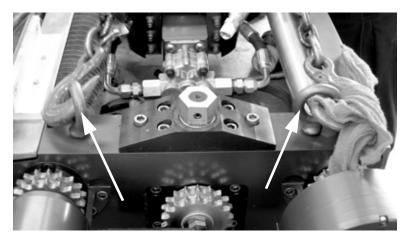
Two lift hooks are provided at each end of the frame for lifting the window cutter. The hooks are in threaded holes and can be removed.
